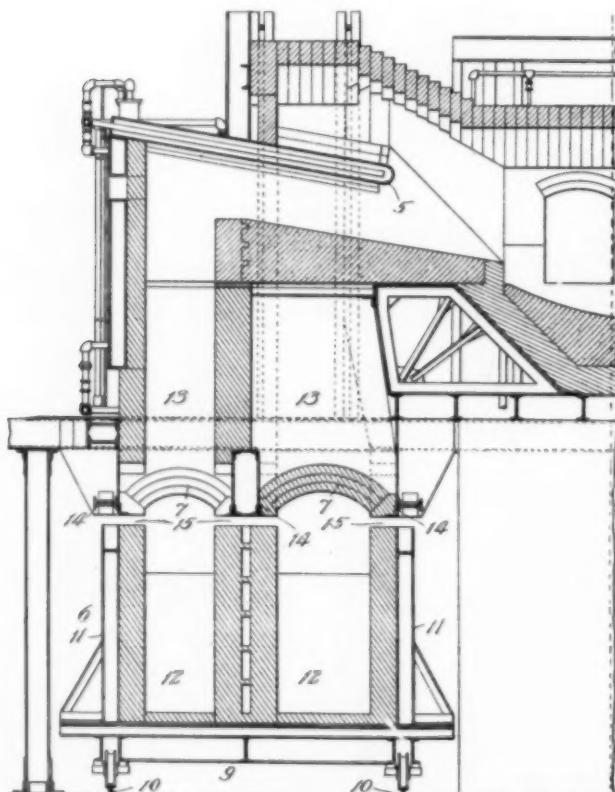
MOVABLE SLAG POCKET FOR OPEN-HEARTH FURNACE.
